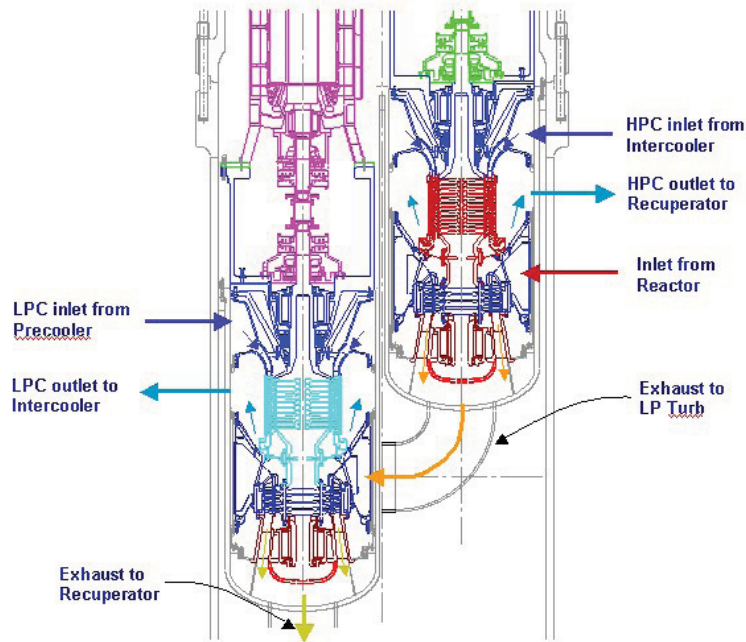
Twin Shaft - Gas Flows Through Turbomachinery
